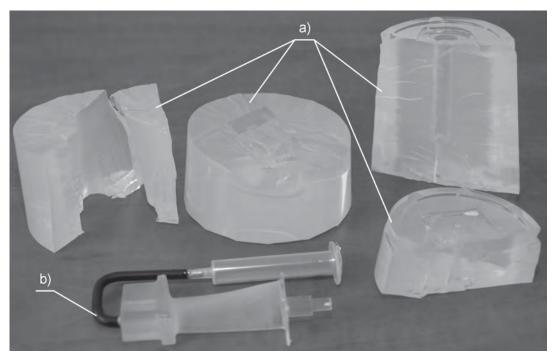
Silicone mold (a) manufactured on the basis model kit (b)
